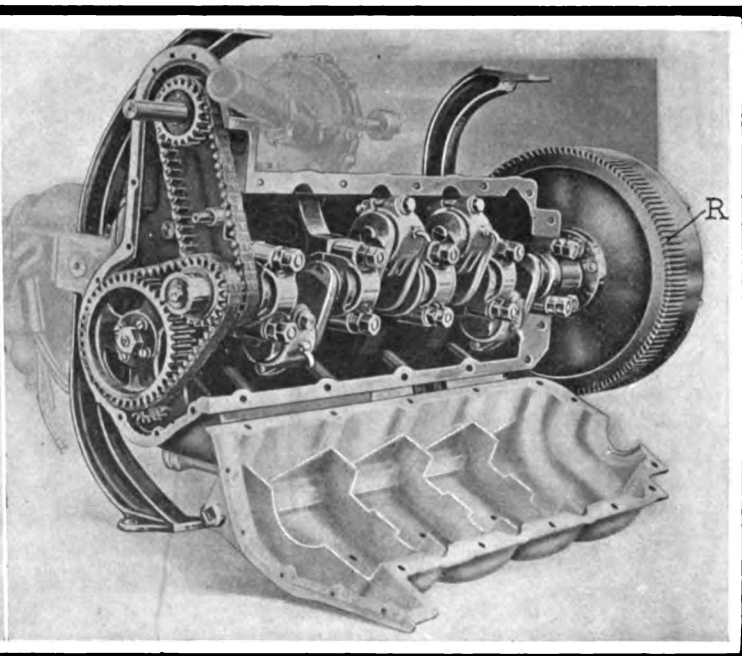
Bottom of motor, illustrating 5-bearing crankshaft and oil compartments
